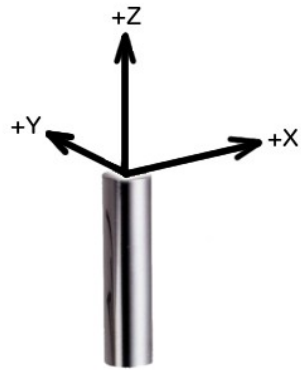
Pin and ring gauge alignment. Z axis is parallel to the axis of the cylinder.
